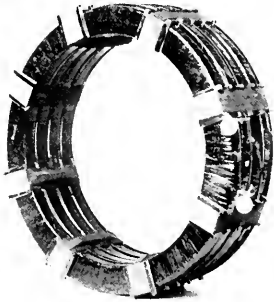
A FINISHED GROUP OF HIGH-VOLTAGE COILS READY TO BE ASSEMBLED ON THE TRANSFORMER
